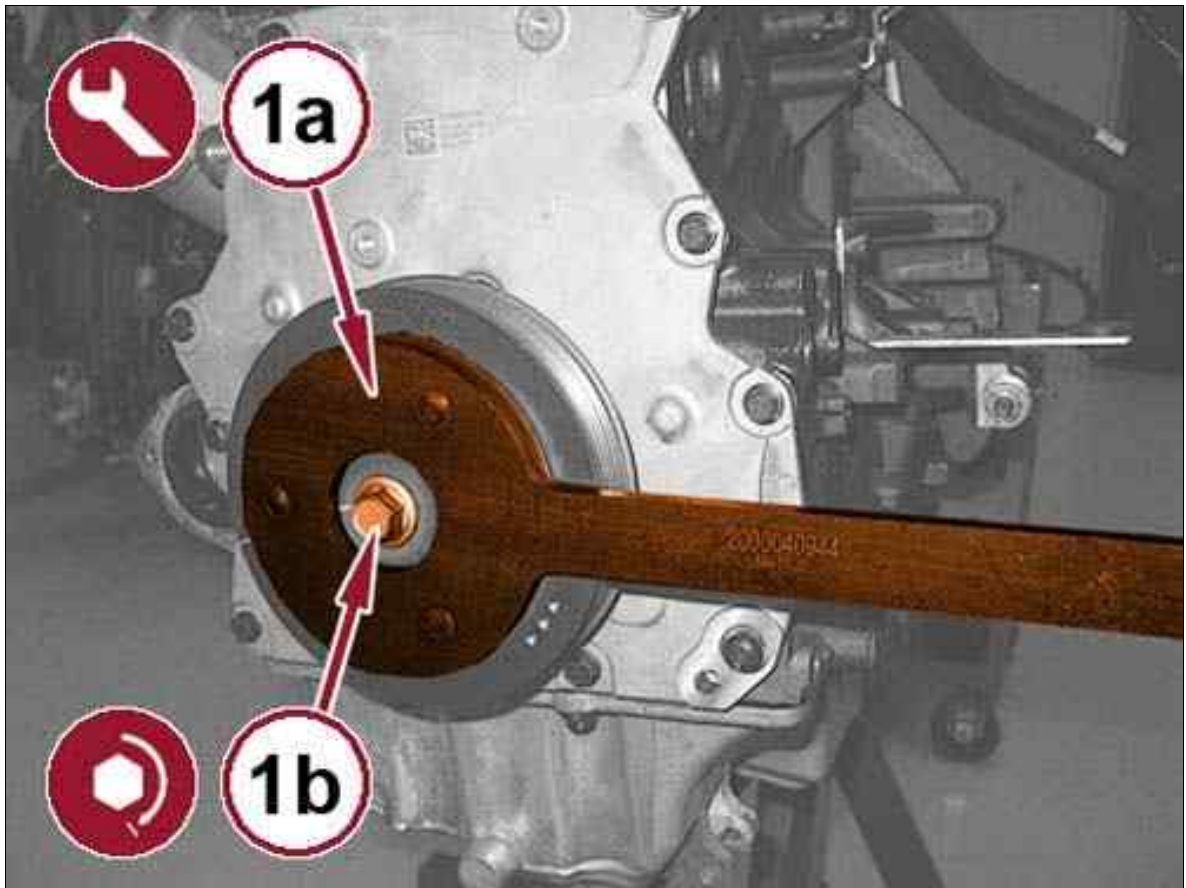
Using Special Tool To Install Crankshaft Pulley Into Housing
